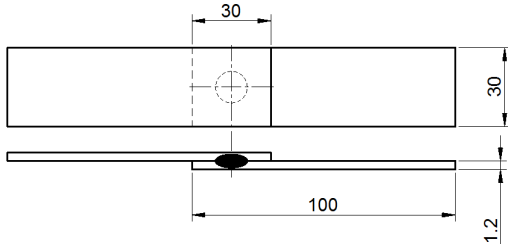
Schematic drawing of the specimen(Unit: mm)
